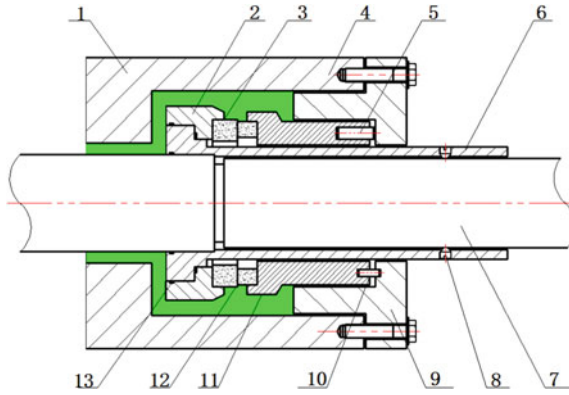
Structure diagram of mechanical seal. 1-Machine Shell; 2-ush ring; 3-otating seal ring; 4-bolt and back-up plate; 5-spring; 6-axis sleeve; 7-axis; 8-driving screw; 9-gland; 10-top pin; 11-Static ring support; 12-rotating ring; 13-seal ring
